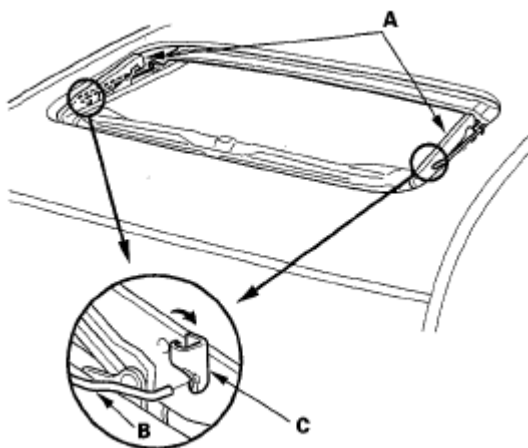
Identifying Glass Brackets And Drain Channel Rods
